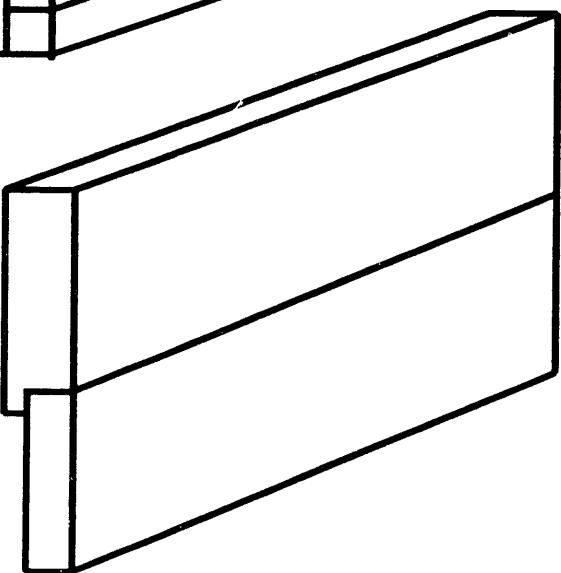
Schematic Illustrating the Cross-Section of an Electron Beam Welded Waste Container Joint.
